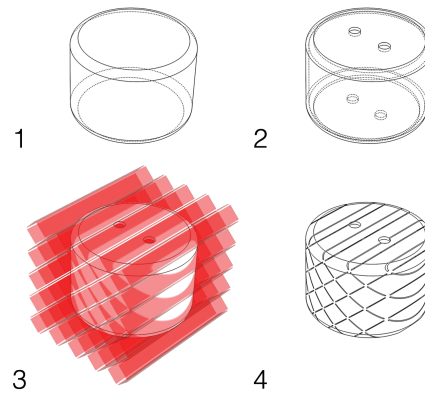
Creating a negshell core in CAD. 1: The solid model representing the core. 2: The core is hollowed to a 0.4 mm shell. 3: Cutting the cross-hatch pattern into the hollowed core. 4. The final negshell core ready for 3D printing.
